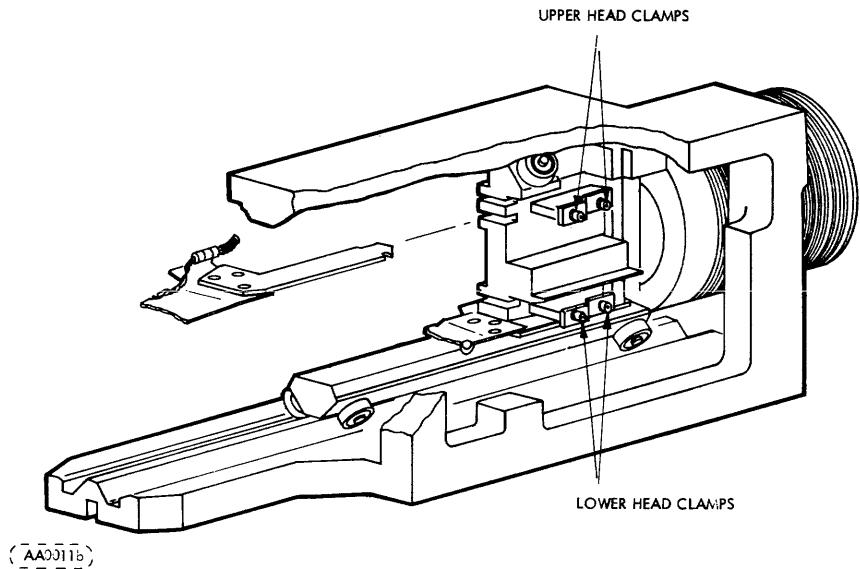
HEAD REMOVAL AND REPLACEMENT
